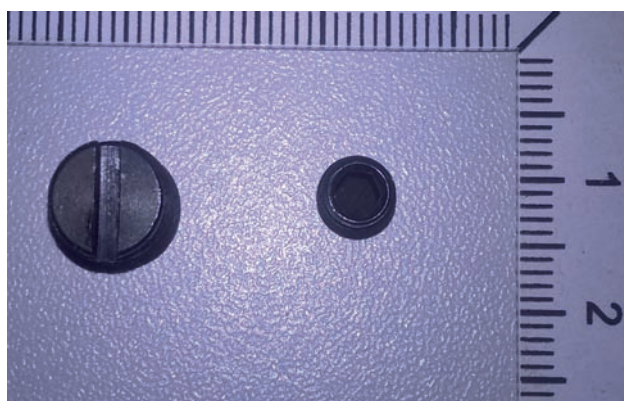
Plug (without socket) mounted at the end of the barrel and plug with hex-key socket in the top of the barrel.
